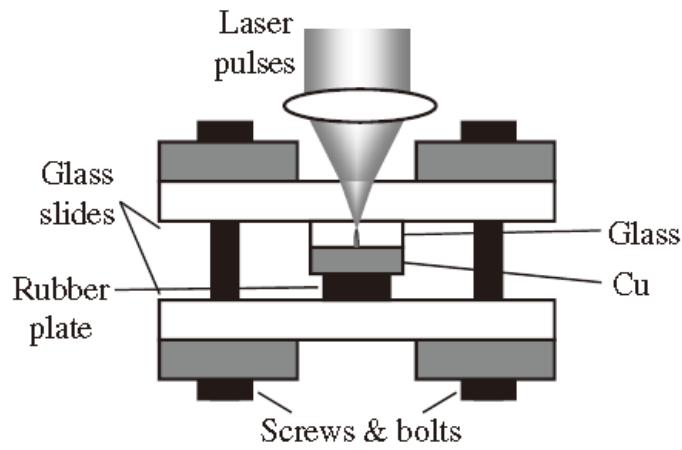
Schematic of the fixture for holding samples to be joined [3].
